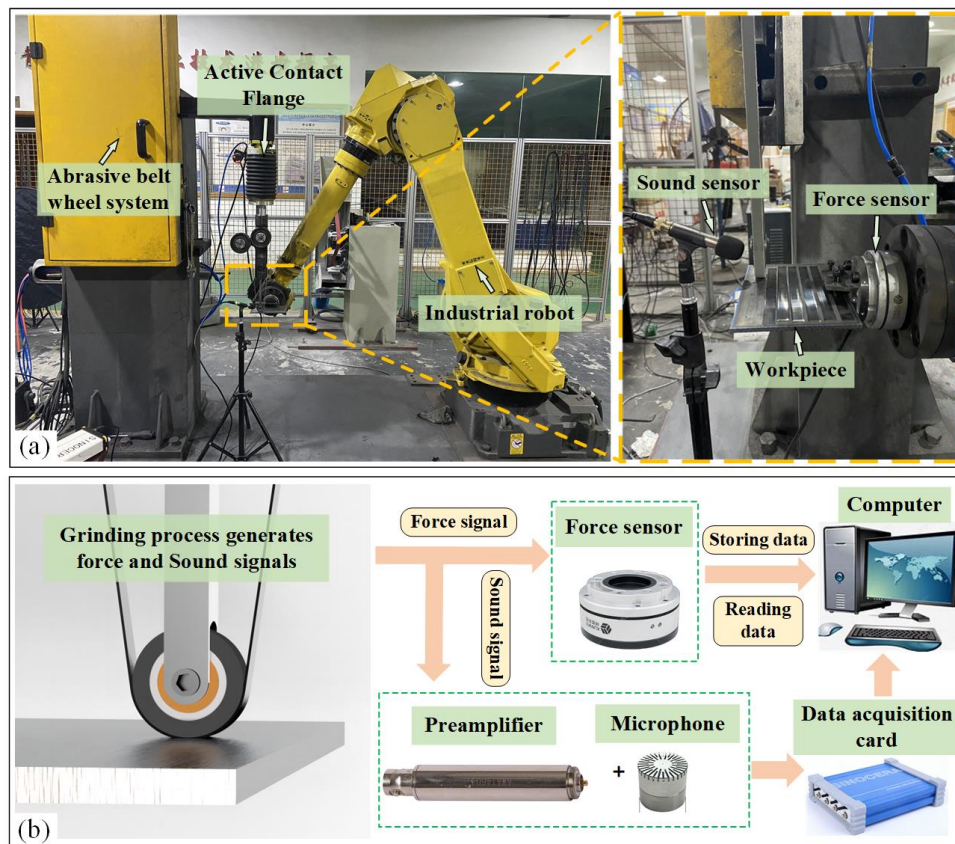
(a) Robotic flexible belt grinding system, (b) signal acquisition equipment.
